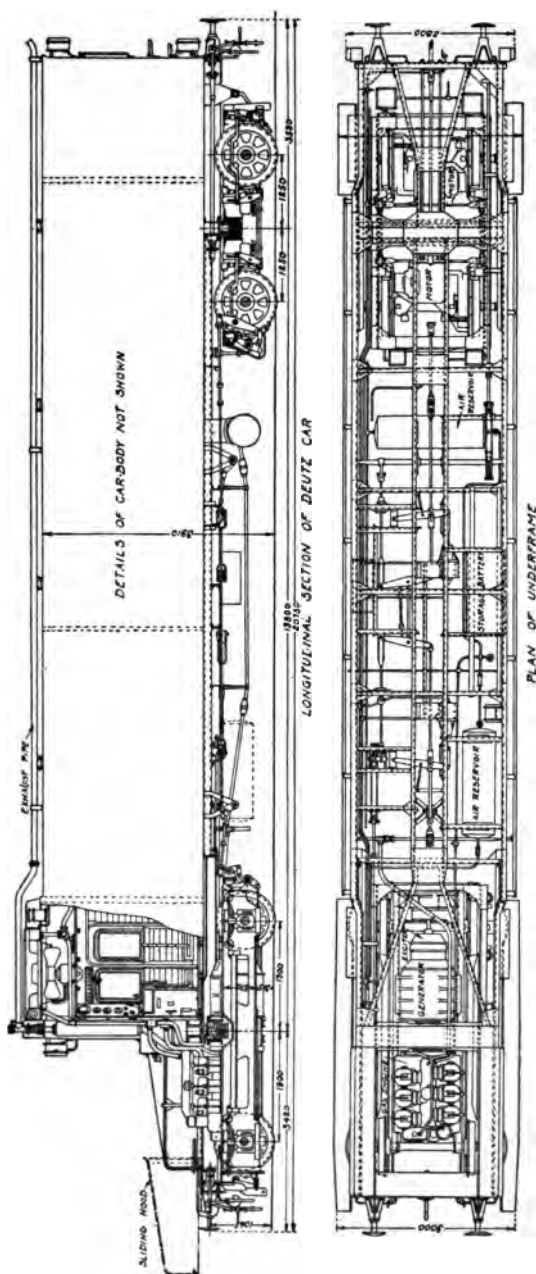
Plan and Longitudinal Section of Underframe of Deutz Car
